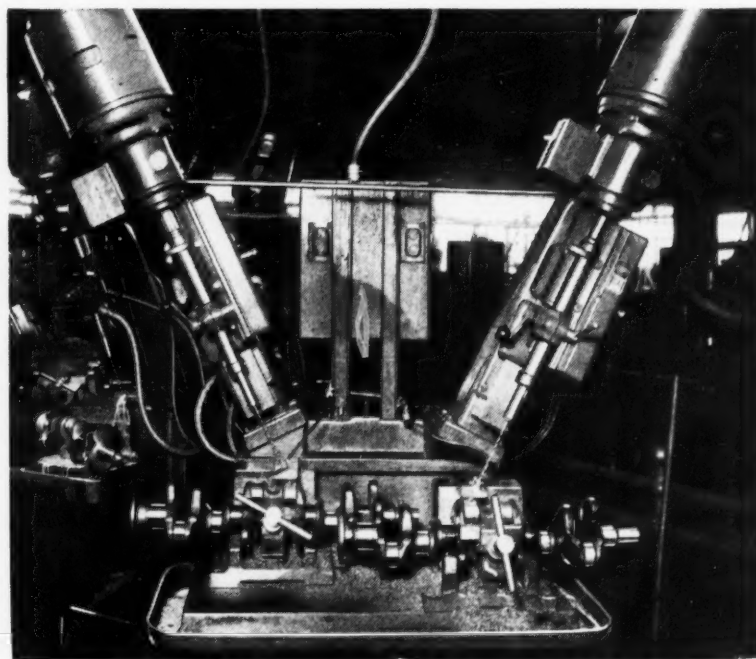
Machine Equipped with Two Fixtures for Drilling the Nos. 3 and 4 Crankpins of Plymouth Crankshafts
